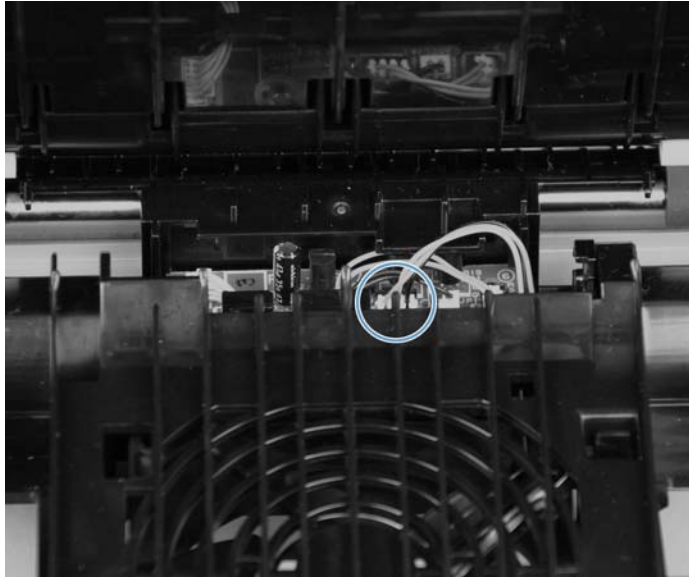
Remove the rear-door rib assembly (1 of 3)
